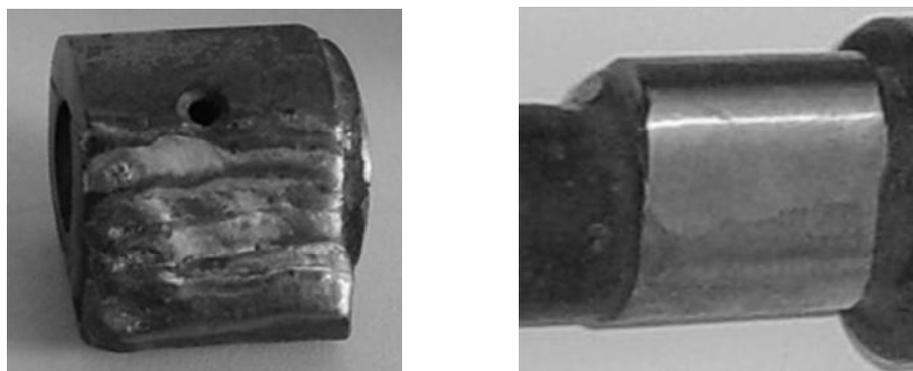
A general view of surface of cam which remelted and cladded with a high frequency magnetic field TIG-method
